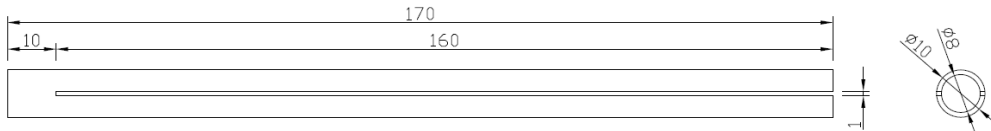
Drawing of the aluminium sleeve included in the dead end anchorage
